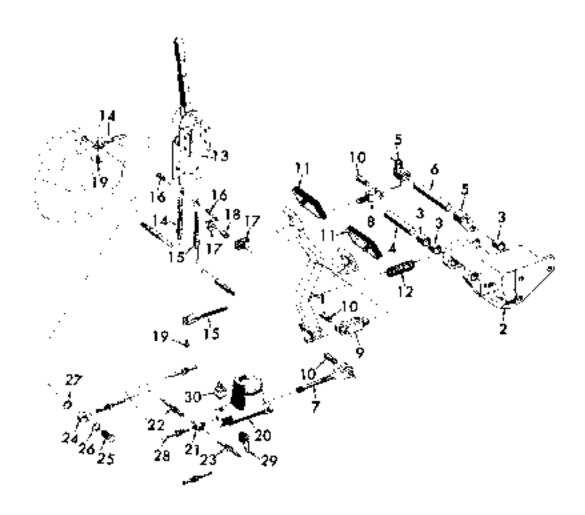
BRANE LINKAGE AND MASTER CYLINDER
